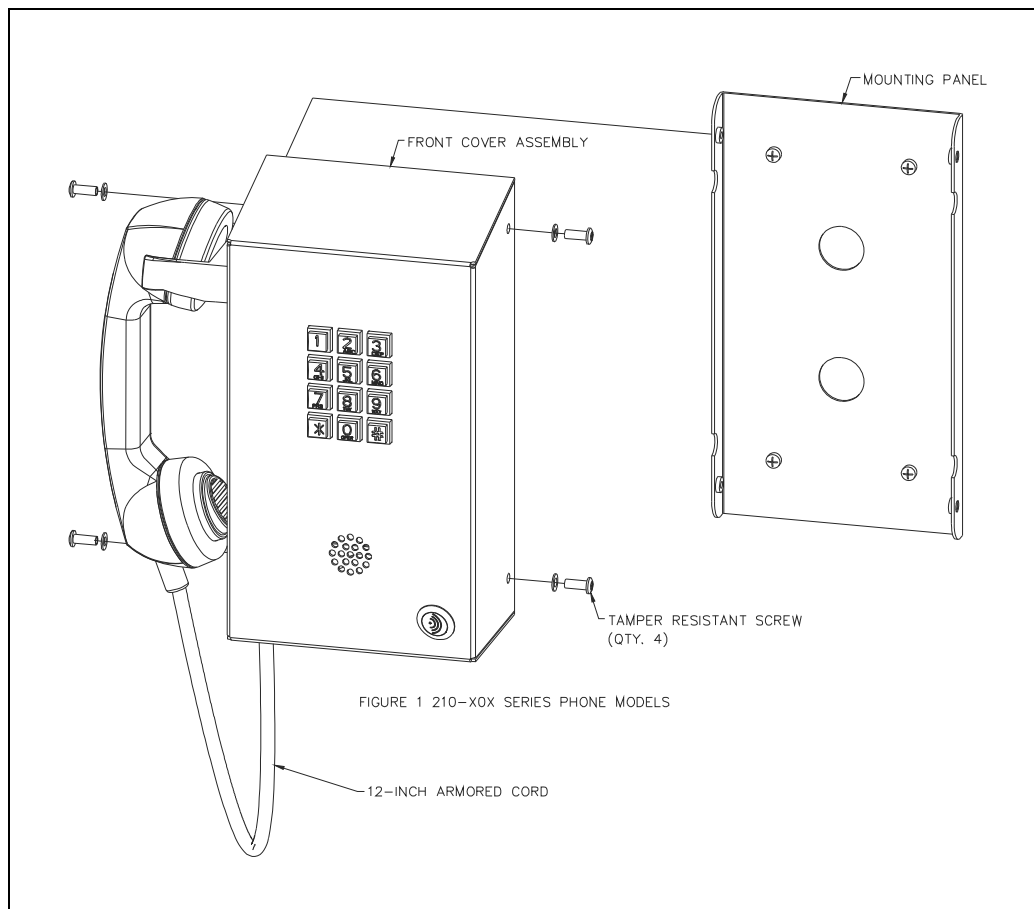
Model 210-001BH and 210-700BH—Front Cover Removal
